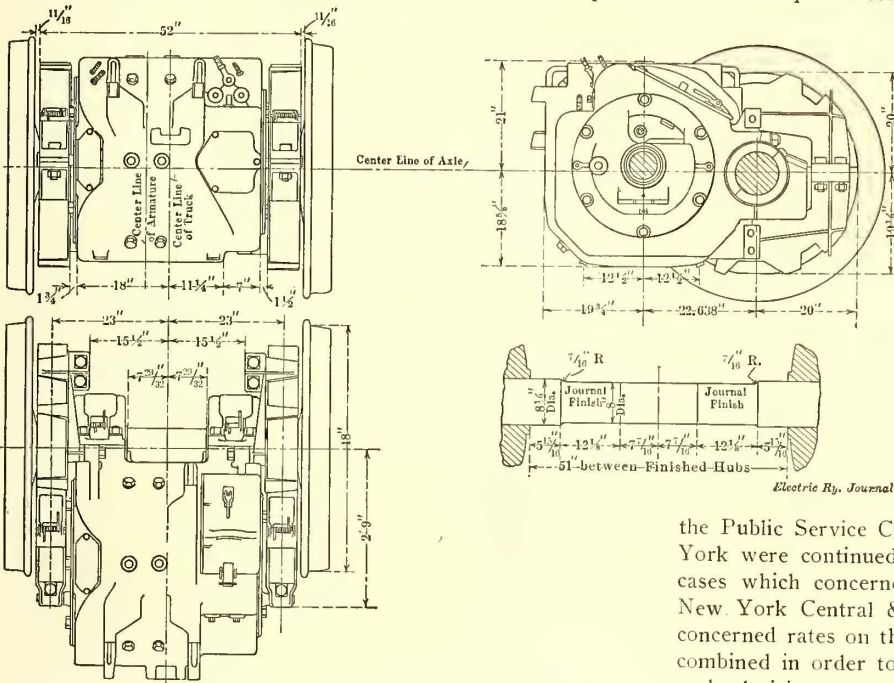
Detroit Tunnel—GE-209-A Railway Motor
